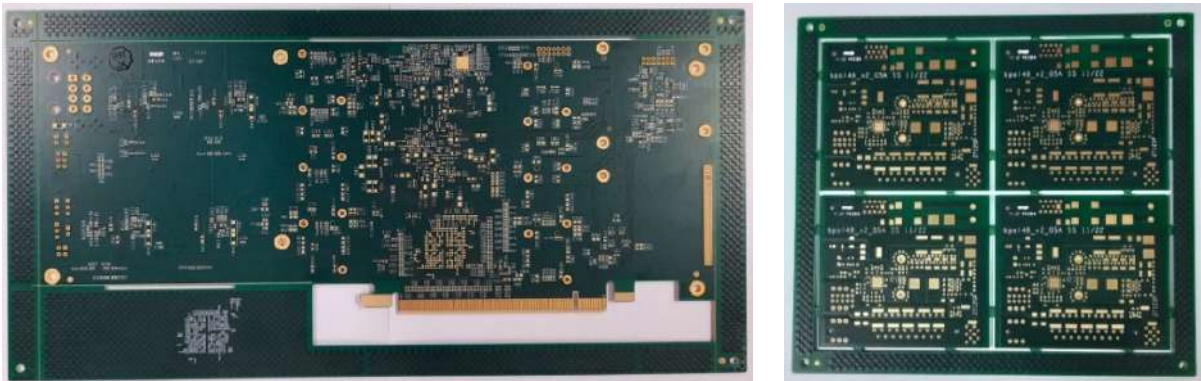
layer PCBs (L), 4-layer PCBs (R) sent to CERN
